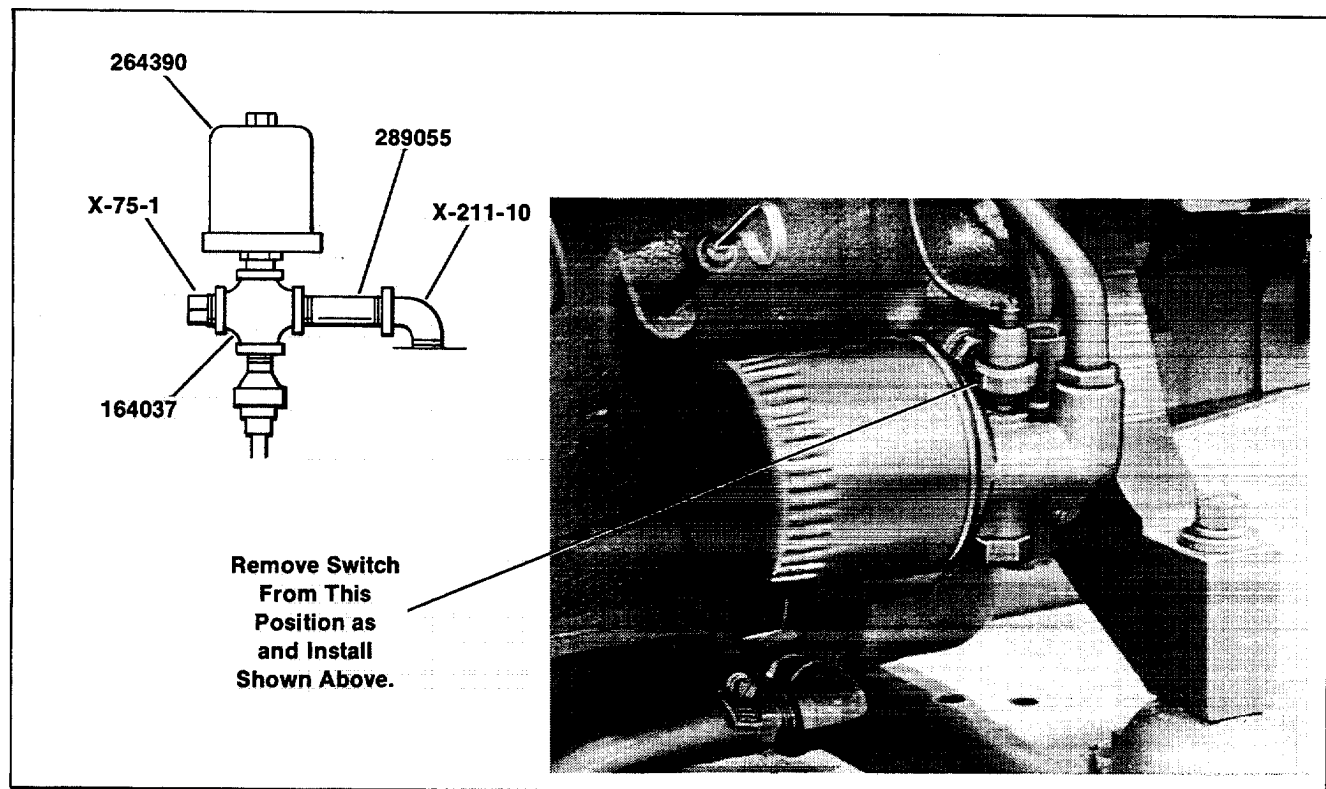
15RMOY, Mounting of Oil Pressure Sender
